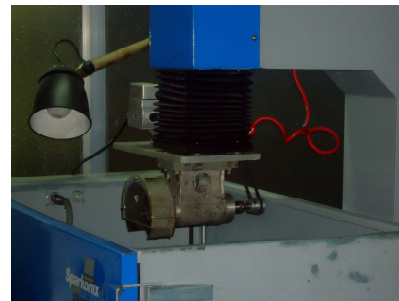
Electrical Discharge Diamond Grinding (EDDG) setup in cut-off grinding
